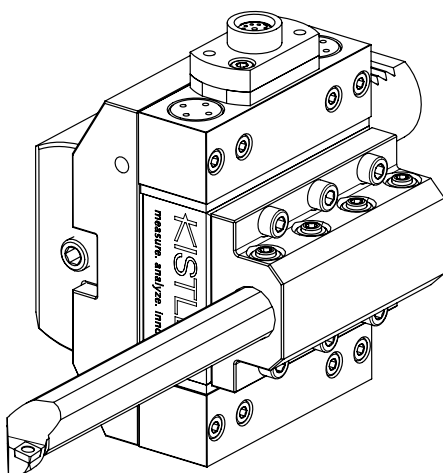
Dynamometer Type 9119AA2 with tool holder Type 9119AF16 and VDI tool holding fixture Type 9119AB30R
